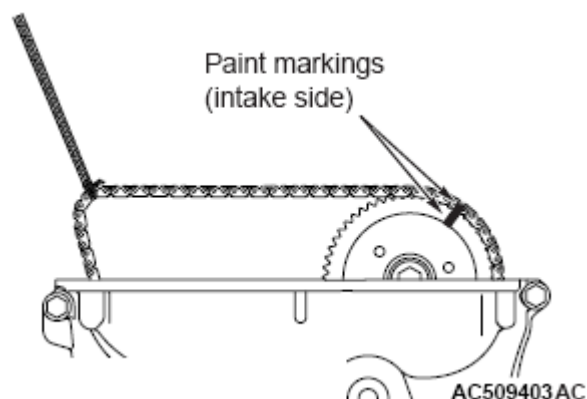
Installing Camshaft And Camshaft Sprocket Assembly
